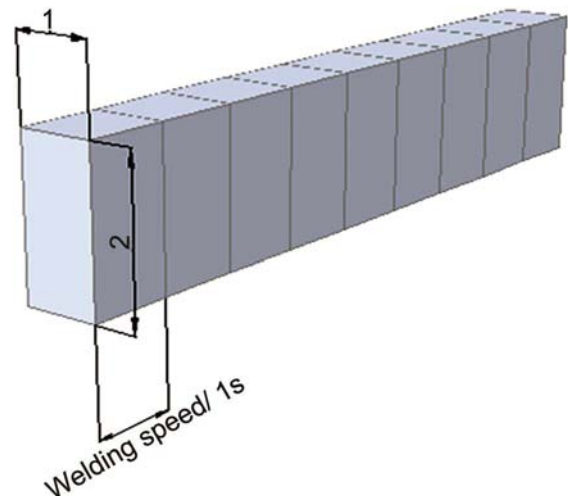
Sections size of the weld bead measured in mm
